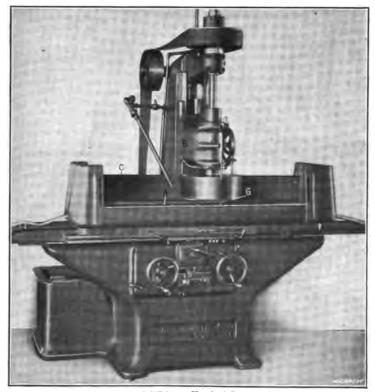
Pratt & Whitney Vertical Surface Grinder
